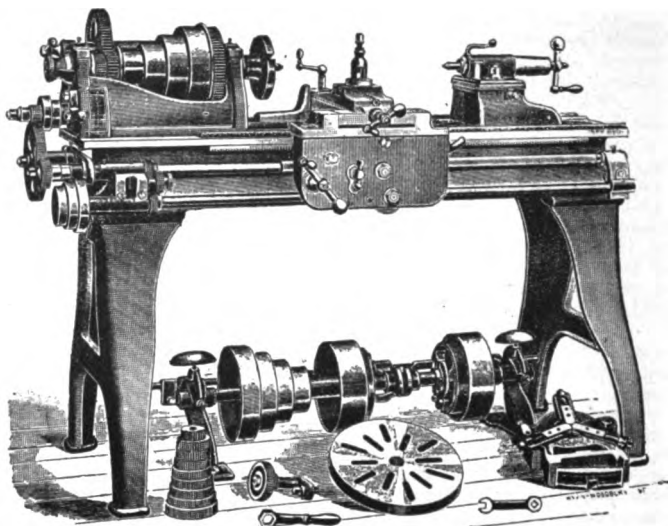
14 INCH SWING ENGINE LATHE WITH ELEVATING OIL REST.
